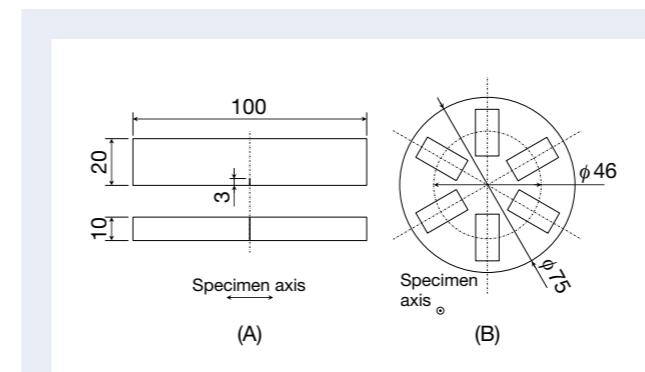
Shape and dimensions (in mm) of the four-point bending test specimen: (A) rectangular specimen, (B) position from which rectangular plates were extracted from the round steel bar
